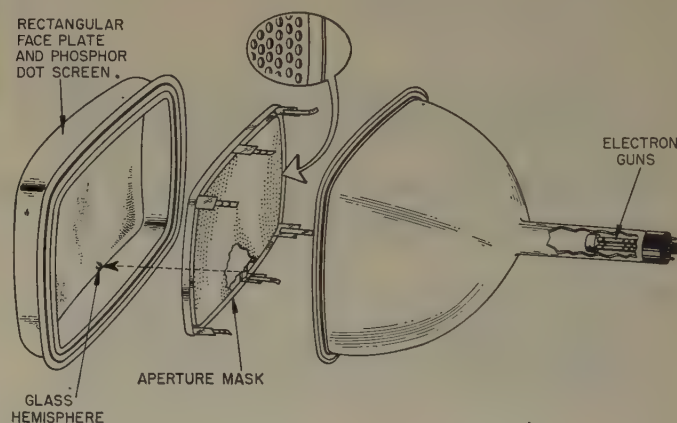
"Exploded" view of proposed 21" rectangular tube.
